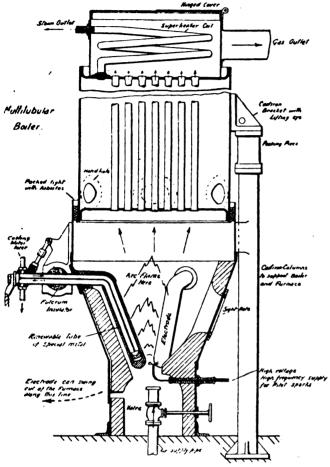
SECTIONAL ELEVATION; KILBURN-SCOTT THREE-PHASE FURNACE.
